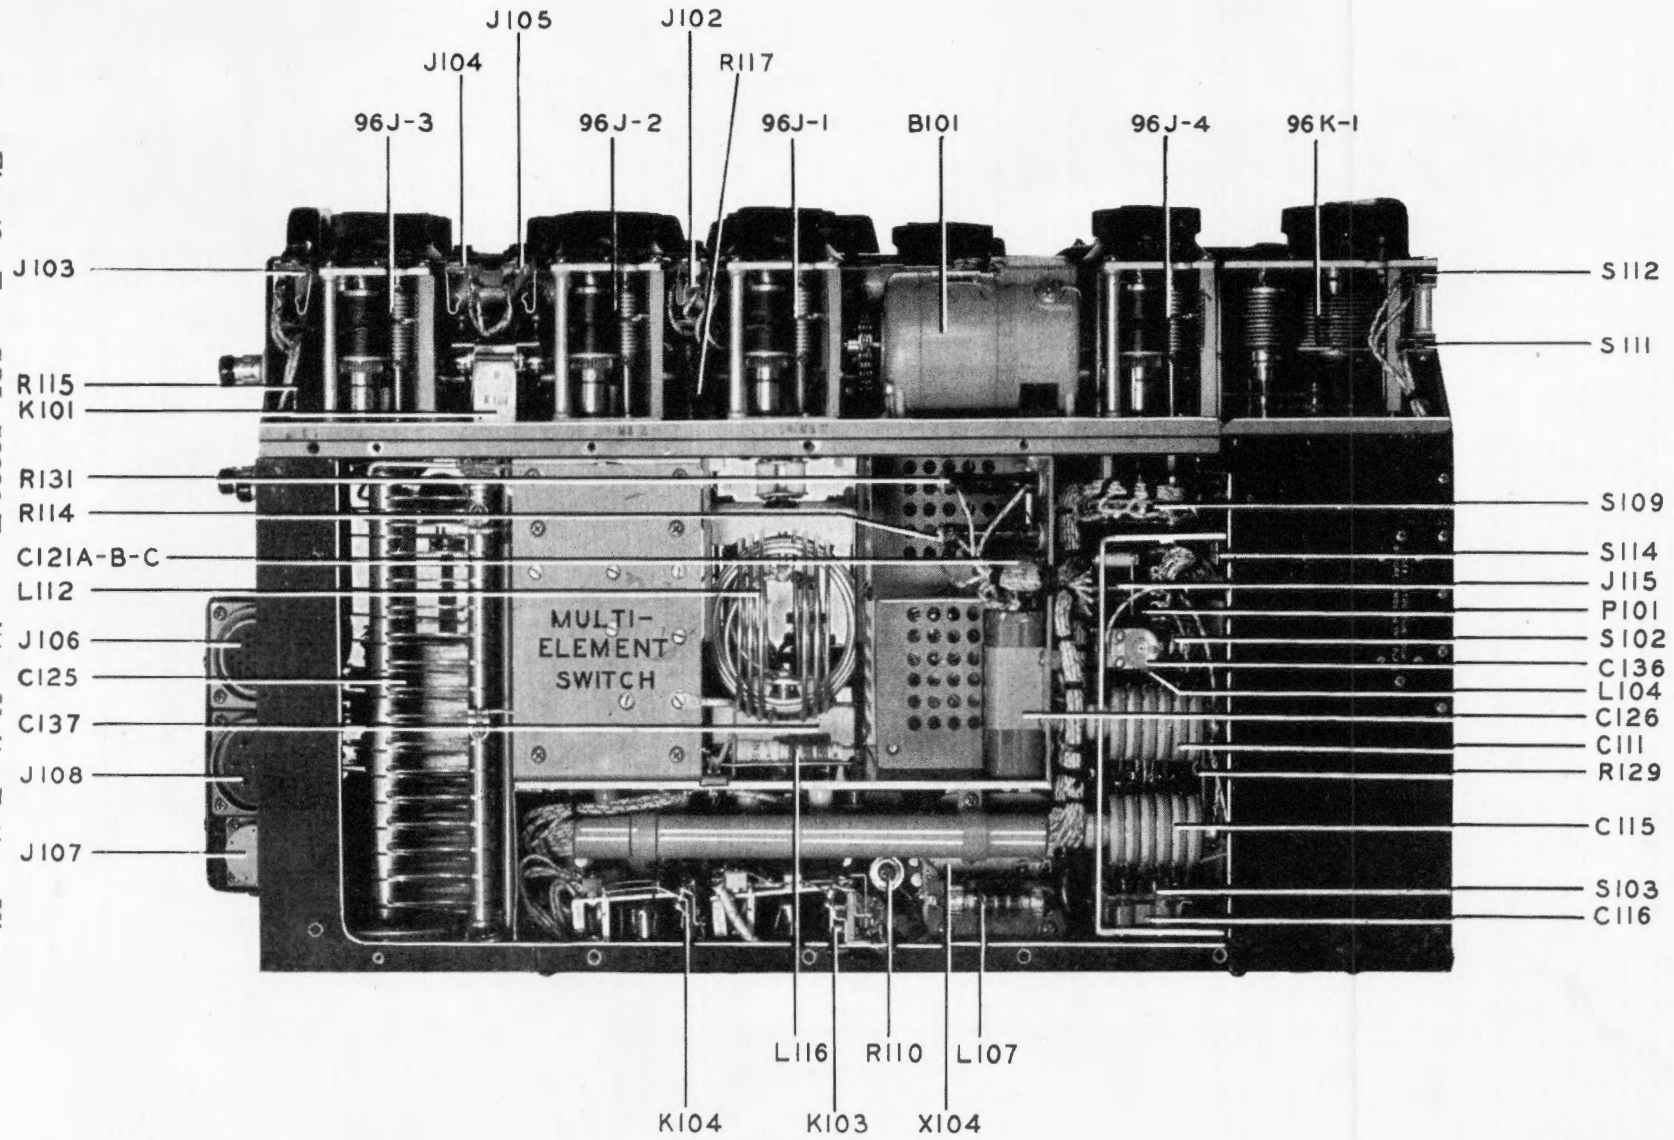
Type COL-52286 Transmitter Unit—Top Open View
